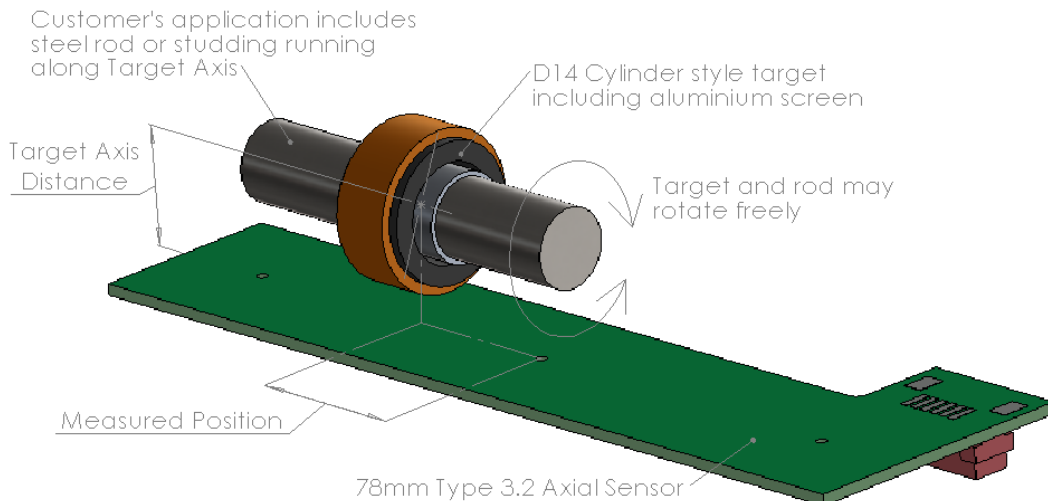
Sensor Assembly illustrated with D14 Cylinder style target
